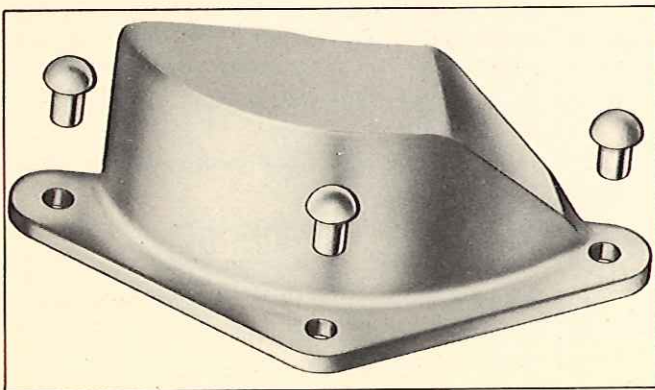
Wedge and rivets, TLD-3 (ms) doors.
